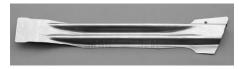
Application of WQ HITEN (1 180 MPa Grade, Door impact beam)
